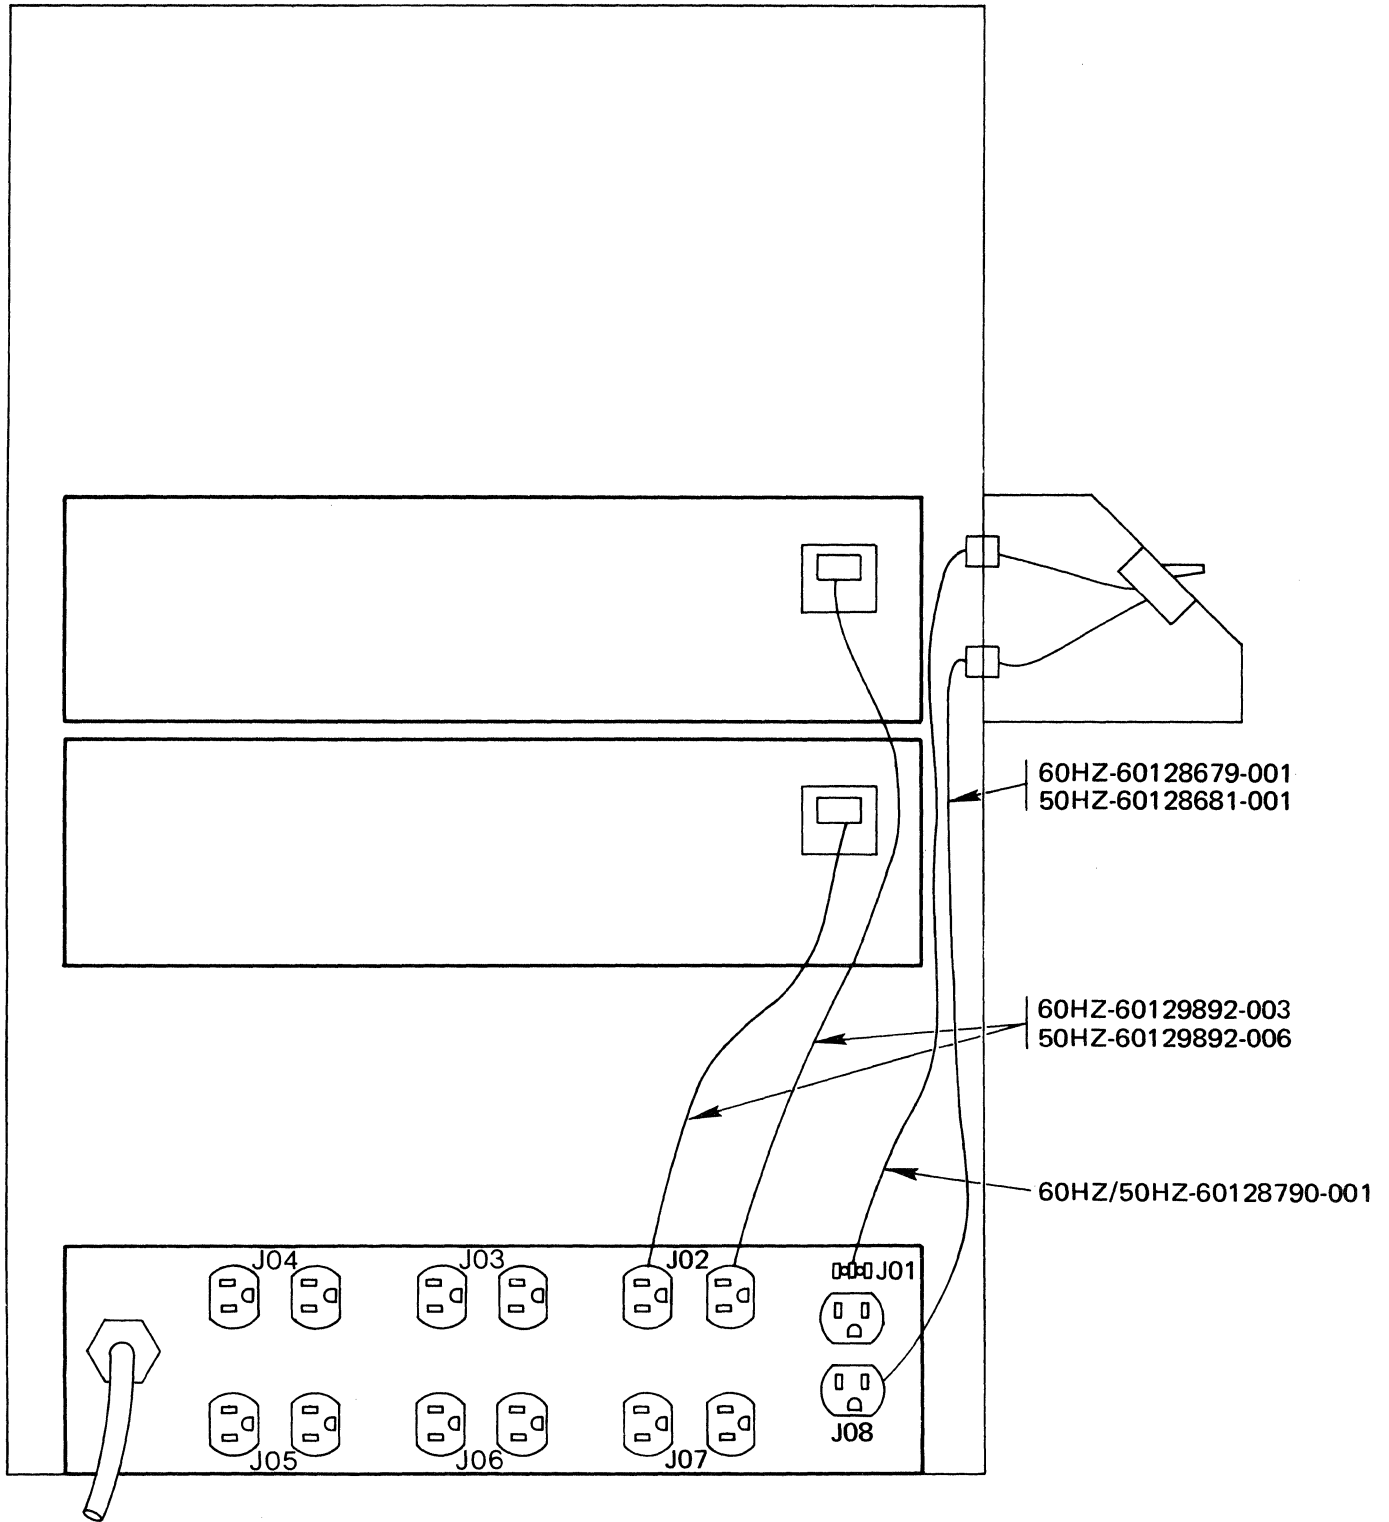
Typical Cabinet Connections, BPDU060B and BPDU050B
